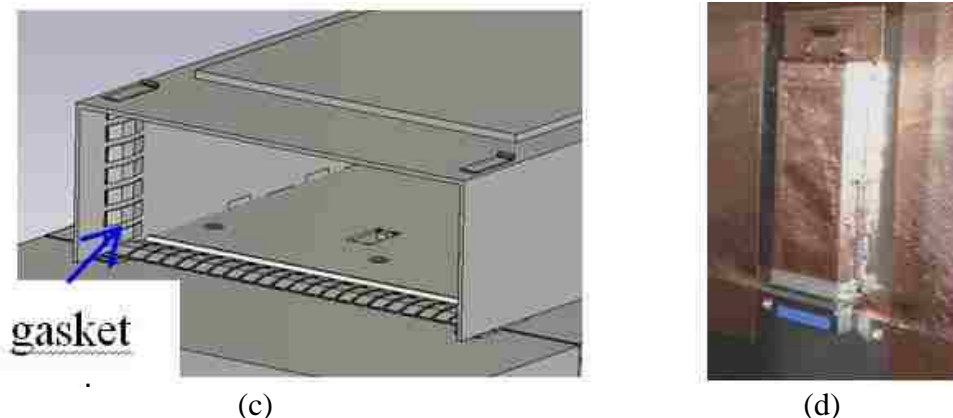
Connector with optical cage and optical module enclosure. (c) Gasket inside of optical cage to contact the optical module sub-assembly enclosure. (d) Test vehicle in reverberation chamber. (Cont.)
